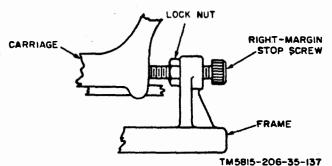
Right-margin stop-screw adjustment (TT-4A/TG).
